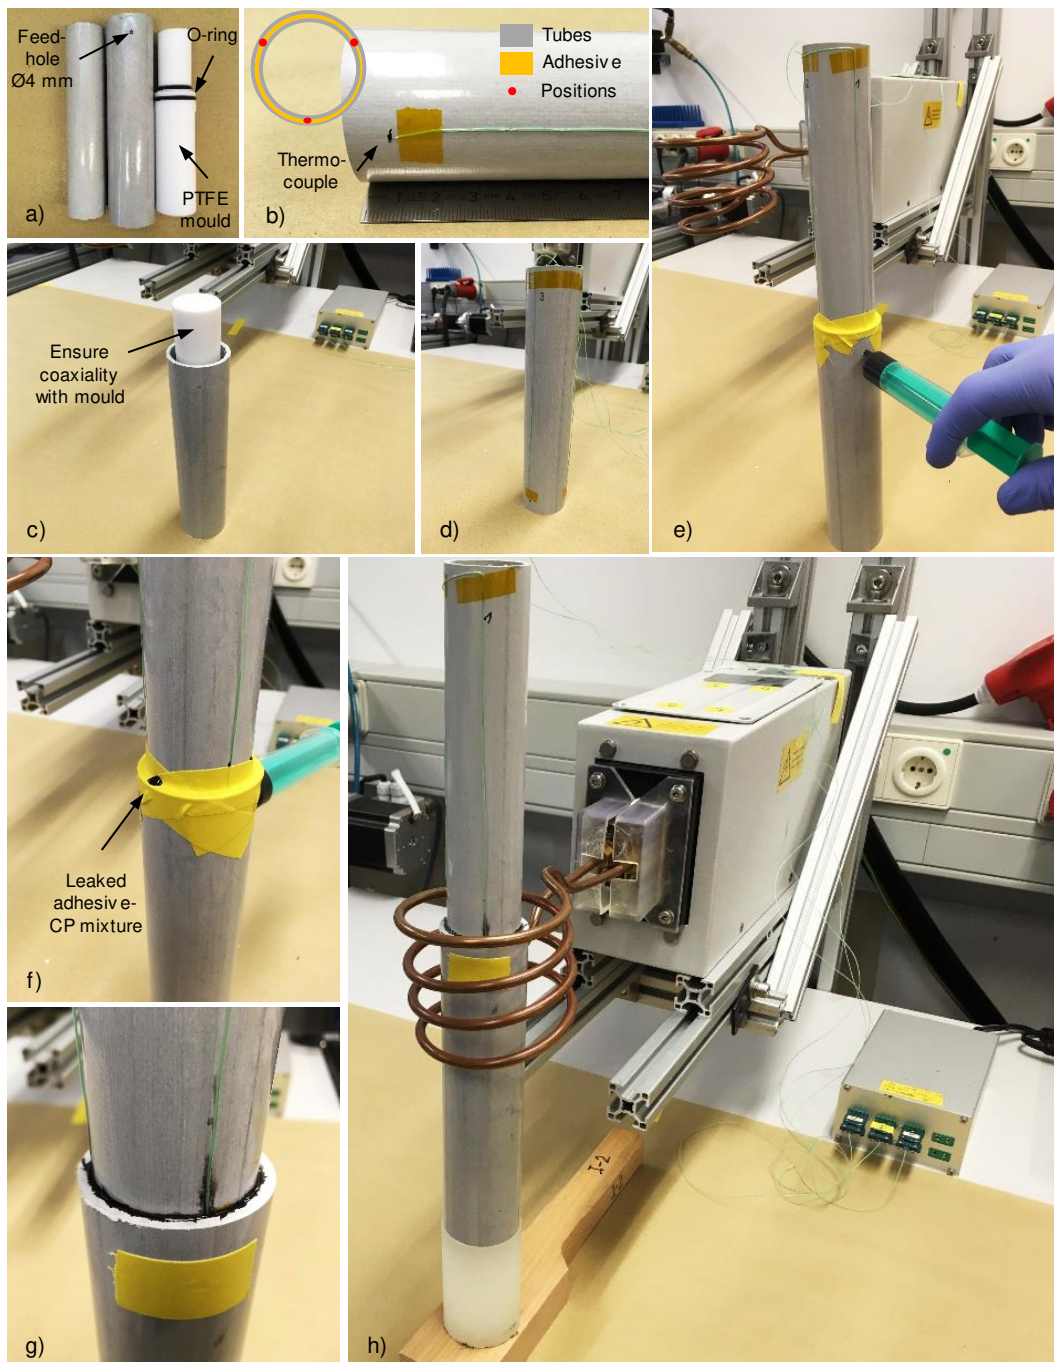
Manufacturing process of SLTJ with a) inner tube, outer tube and PTFE mould, b) thermocouple fixed with temperature resistant polyamide adhesive tape on outer surface of inner tube, c) outer tube cast placed in PTFE mould, d) inner tube with attached thermocouples, e) application of adhesive-CP mixture (herein Fi390) over feedhole, f) leaked adhesive from slit in the tape, g) completely filled joint after removing of adhesive tape and h) positioning of bonded SLTJ specimen during inductive heating with thermocouples attached to the temperature control unit
